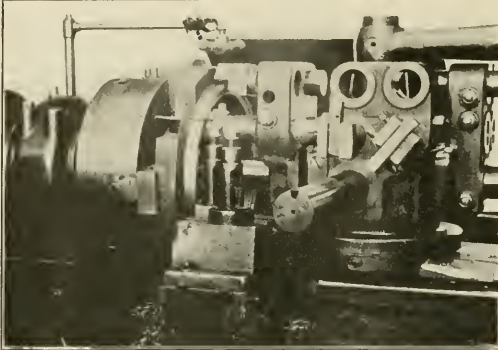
Turning and Boring One Valve Packing Ring on First Semi-Automatic Machine
